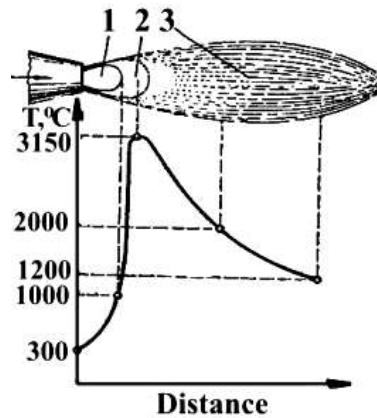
Peculiar zones of welding flame: 1 – core; 2 – welding zone; 3 – tongue (jet)
